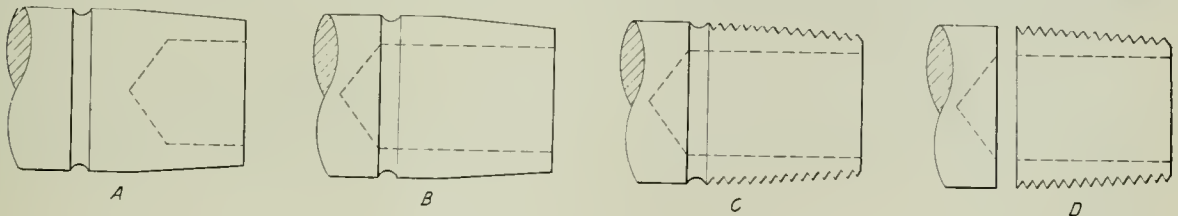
Successive Operations in Making Sleeves for Flexible Staybolts
